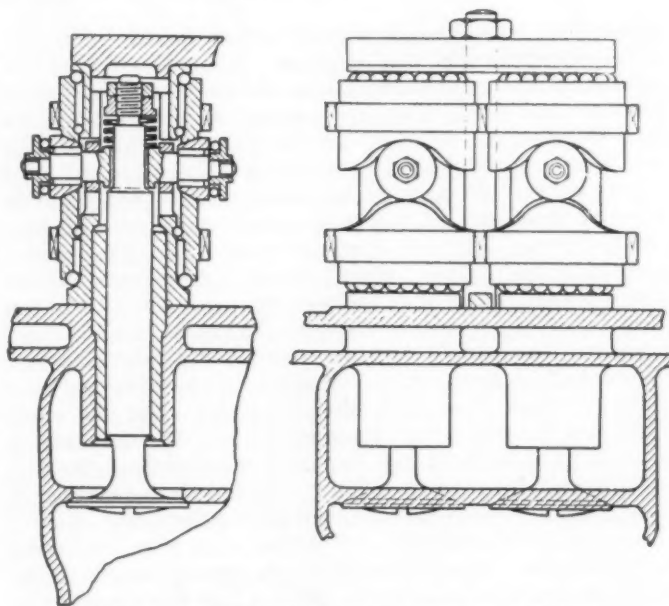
OVERHEAD CAM GEAR ON THE FIAT ENGINE
